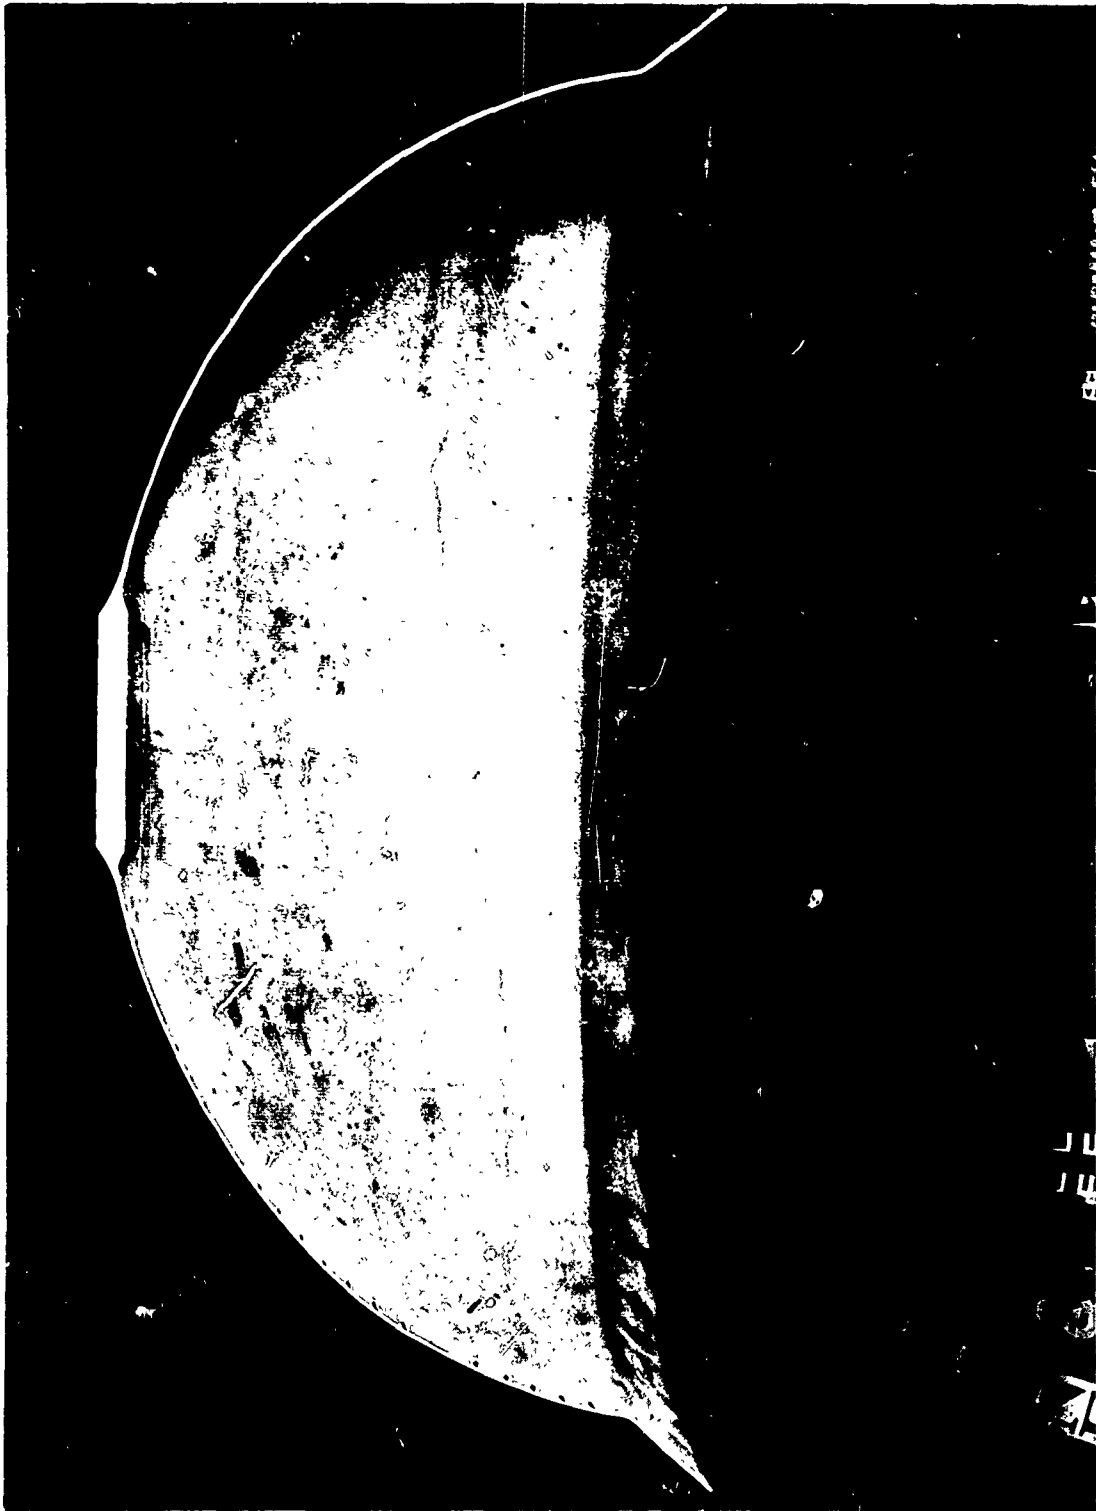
Cross Section of Preform 1B (R) After Sectioning
